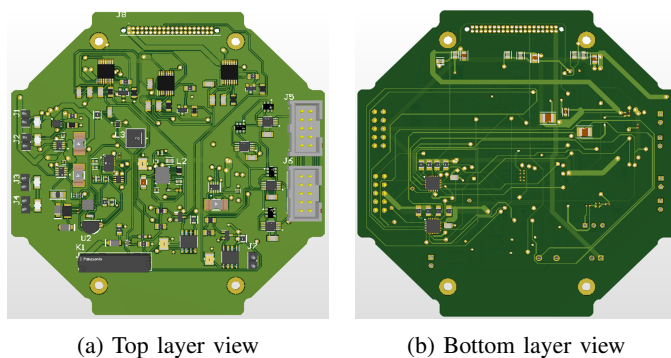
CubeSat EPS PCB Design showing both top and bottom layout layers.
